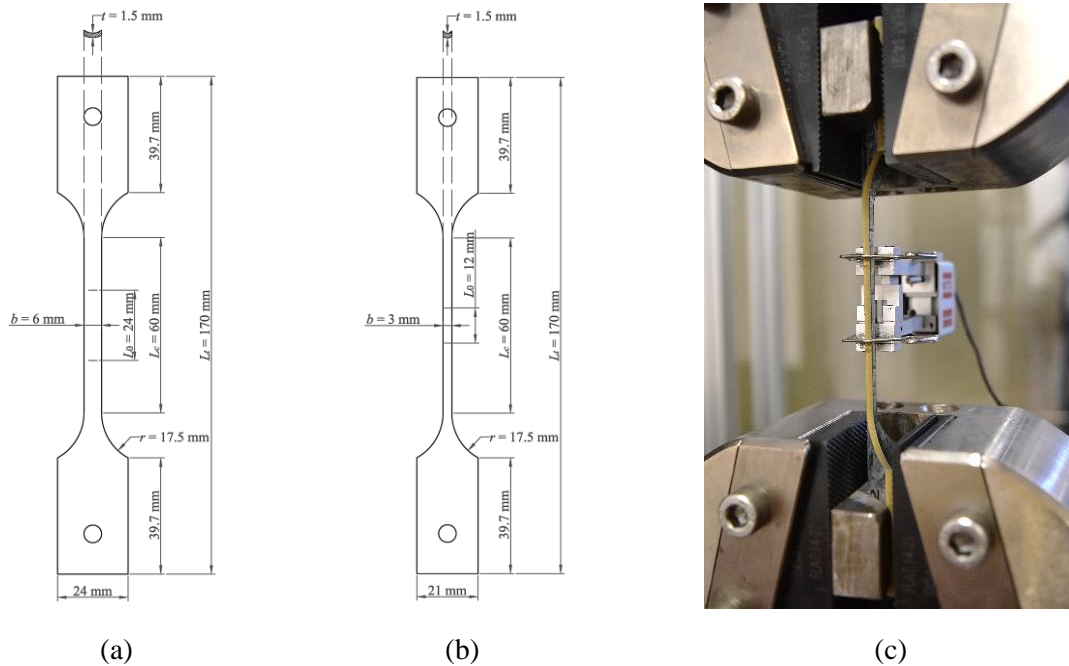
(a) Corner coupon dimensions of the roll-formed section, (b) corner coupon dimensions of the brake-pressed section, (c) tensile corner coupon test set-up
